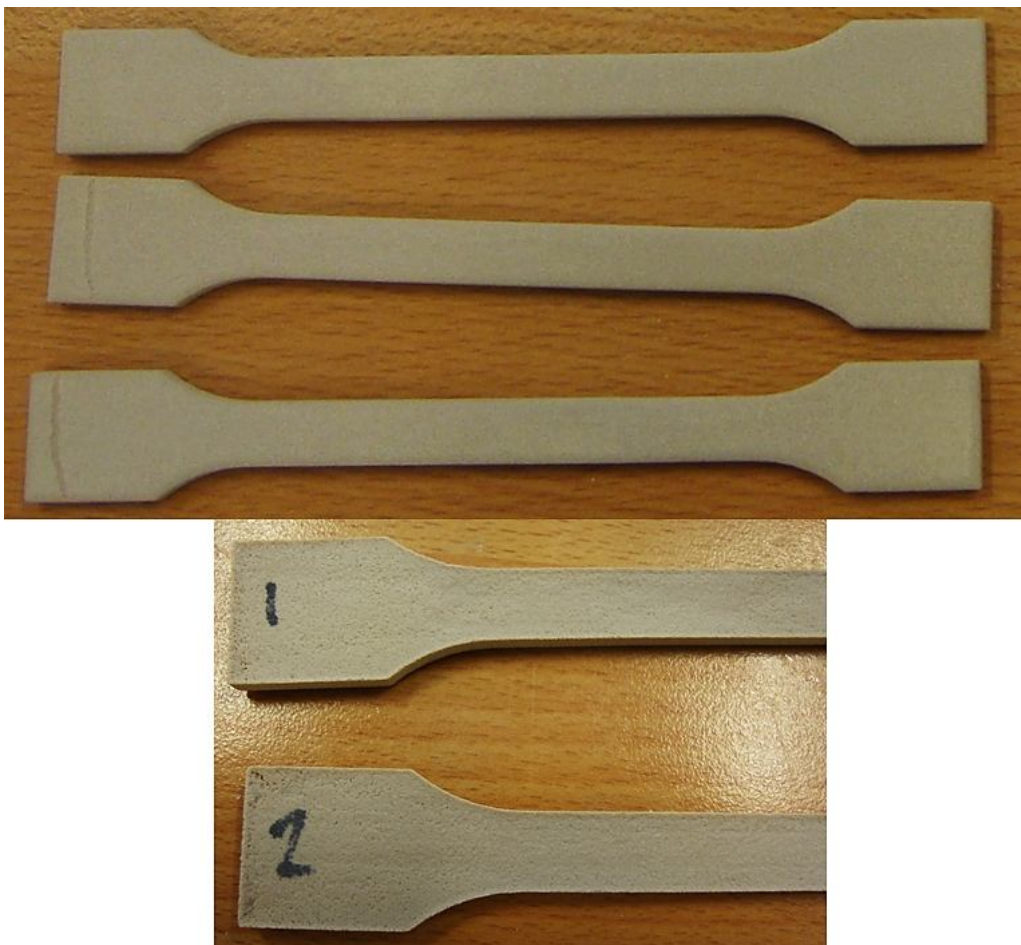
Build for testable HT laser sintered PEEK samples: sample K, manufactured at 110% laser power in respect to the standard EOS laser exposure settings
